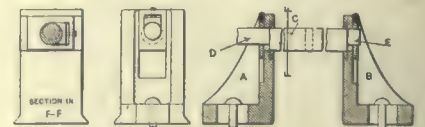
End and Sectional Views of Elliptical Boring Device.
